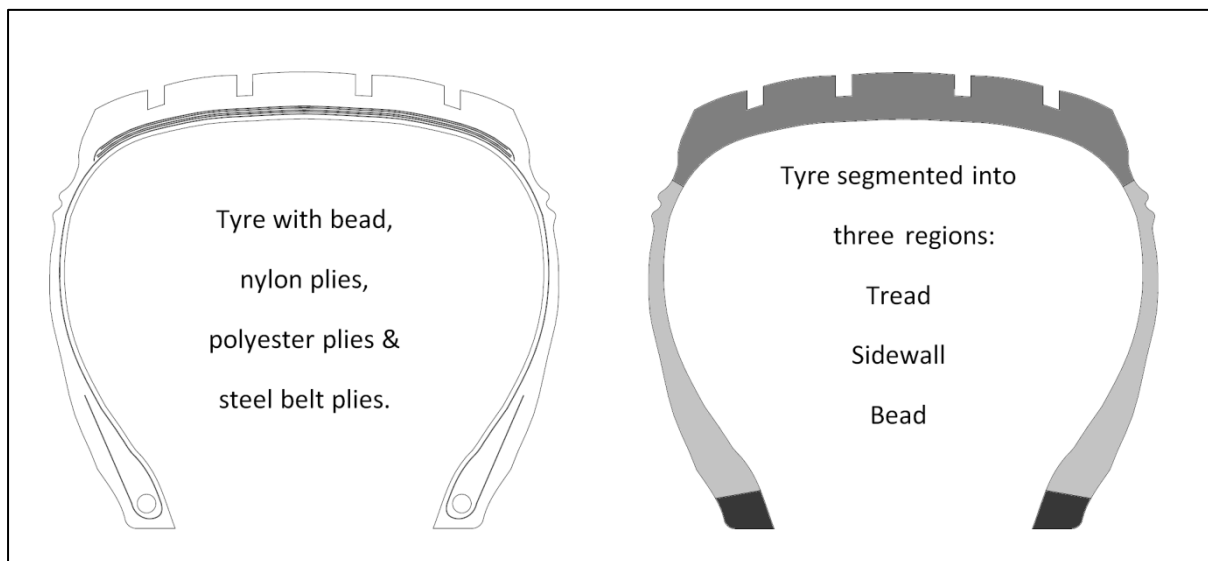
Sectioned view of tyre showing nylon, polyester & steel belts (left) and the segments that the tyre is divided into (right).
